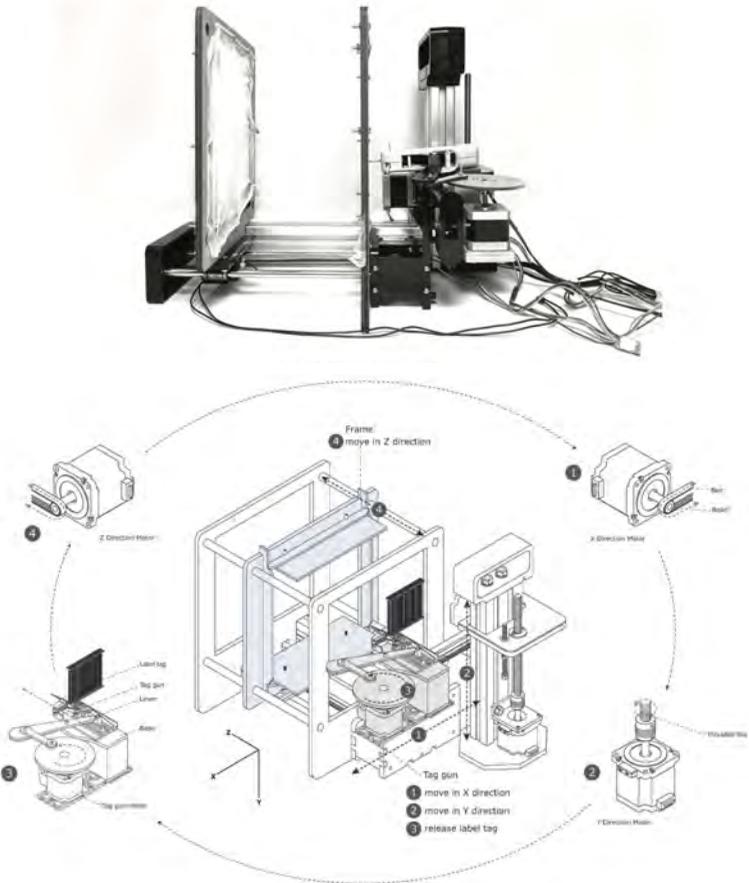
(Top) Hacked CNC stitching machine; (Bottom) Diagram of machine parts and tag-gun actuated motion.
